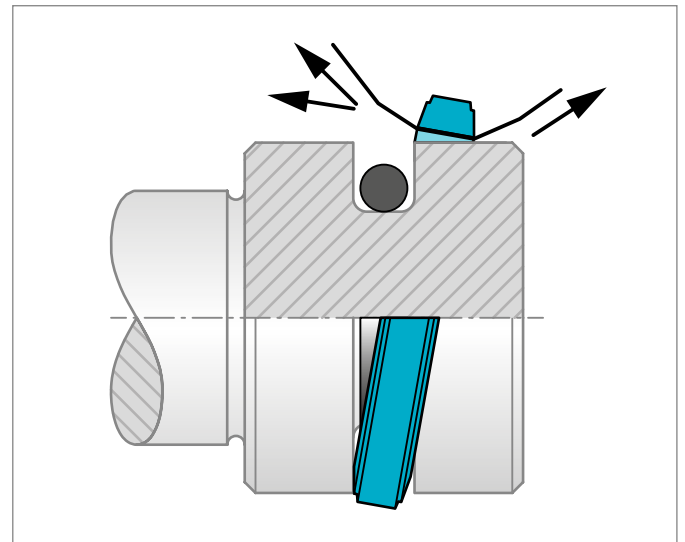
Fitting the seal ring onto the O-Ring in the groove
